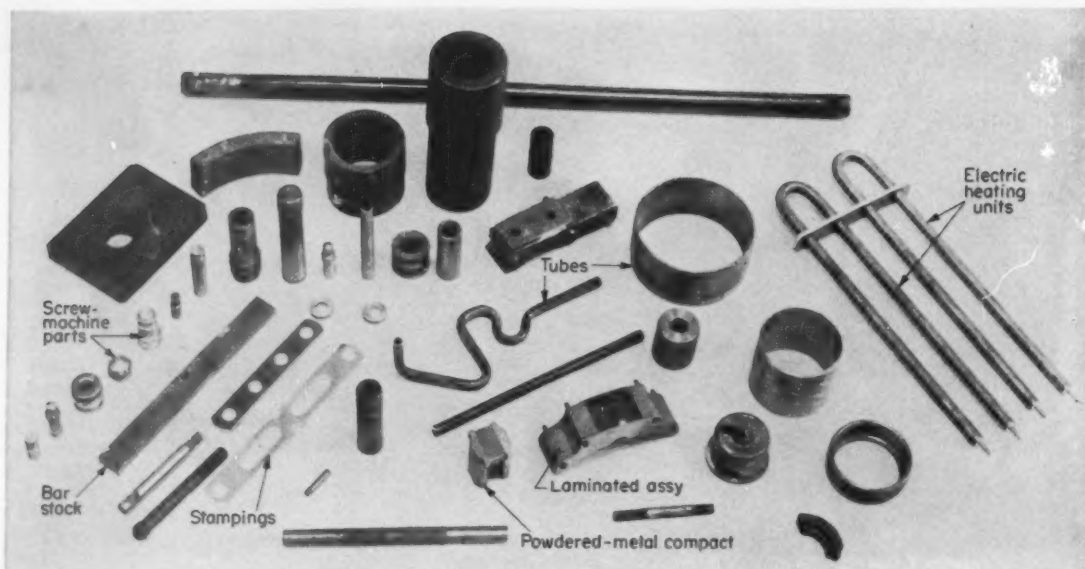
Above—A wide variety of inserts is commonly used in die casting, including bar stock, tubing, stampings, screw-machine products, and standard items such as fasteners
